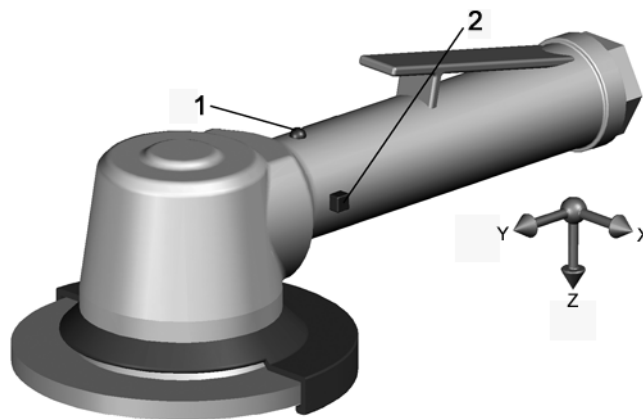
Measurement locations — Pneumatic angle grinder with separate main handle
